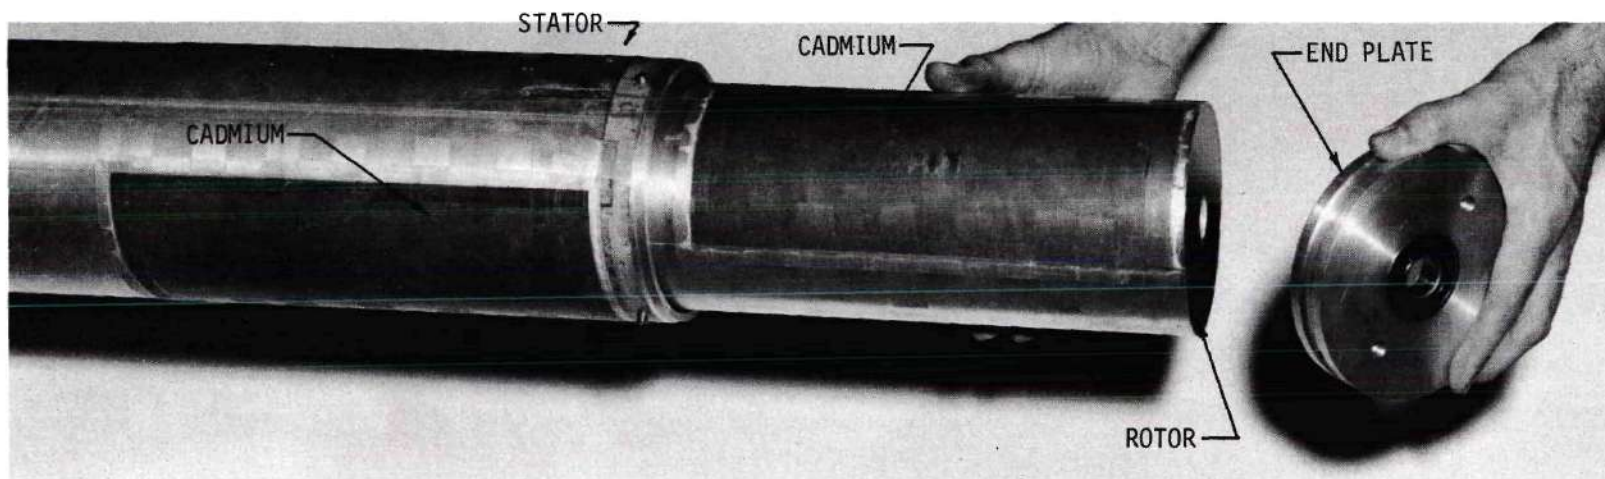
Large Rotor Inside Large Stator Showing Ball Bearings Mounted in the End Plate
